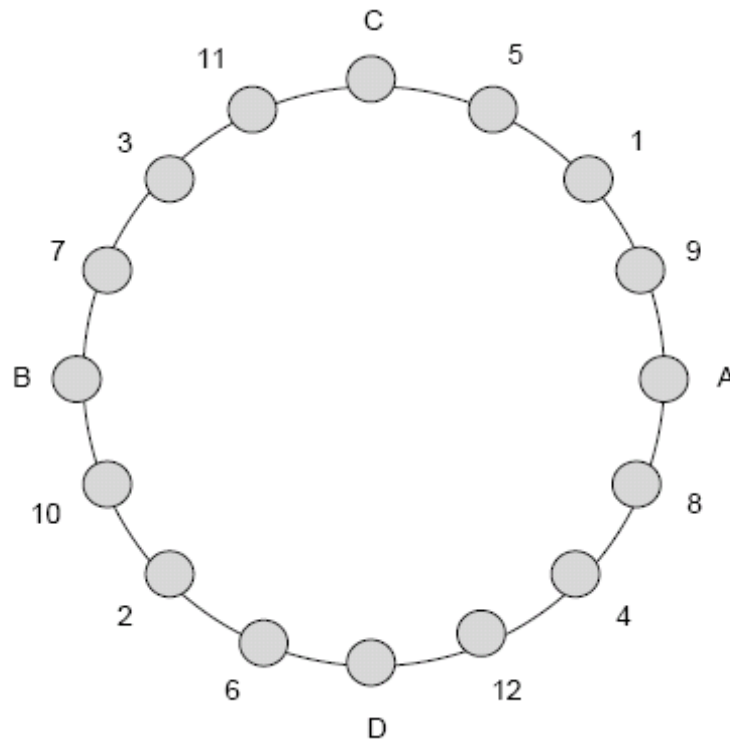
, Tack Welding from OUTSIDE the vessel head
